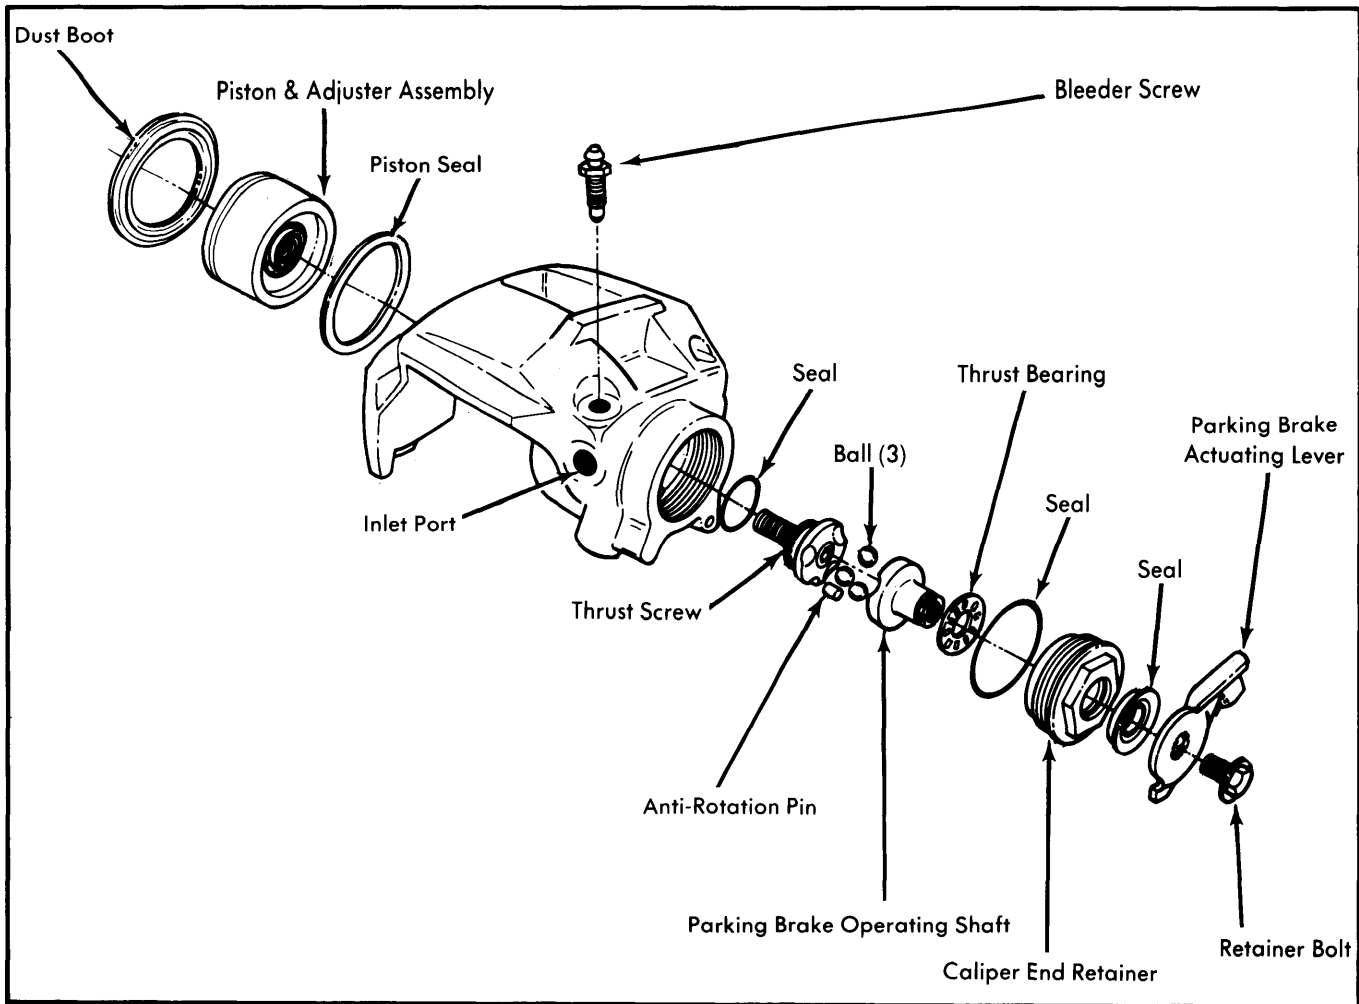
Exploded View of Rear Caliper Assembly (Versailles Only)
